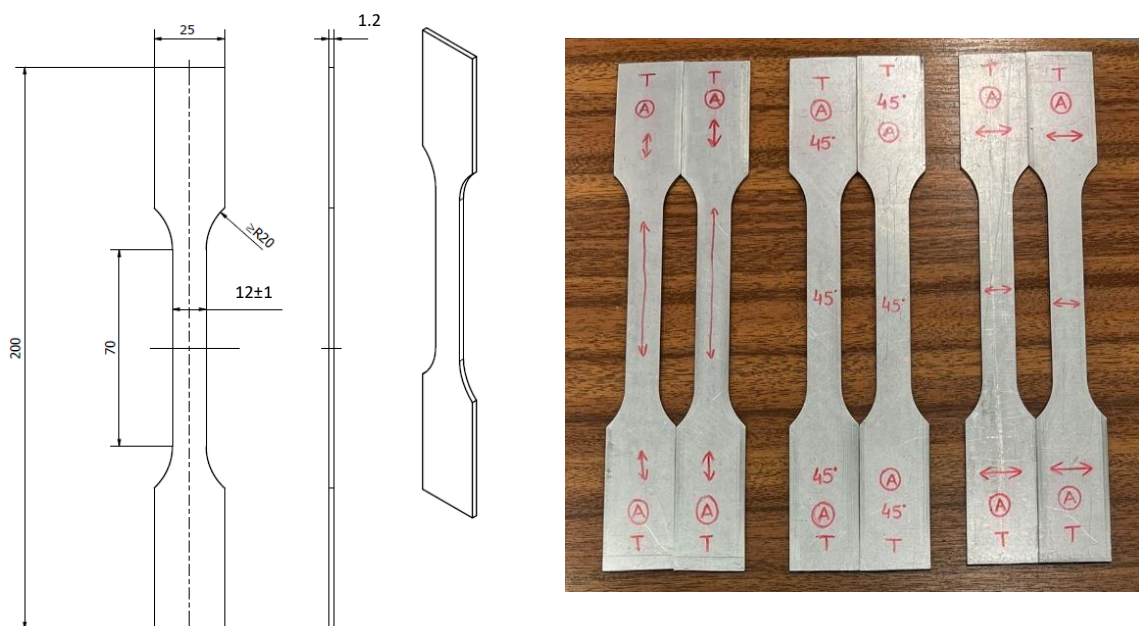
Dimensions of the specimens (left) and group of specimens before testing (right).
